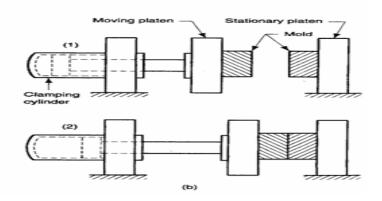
Opening and Closing Position for Hydraulic Clamp [1]
